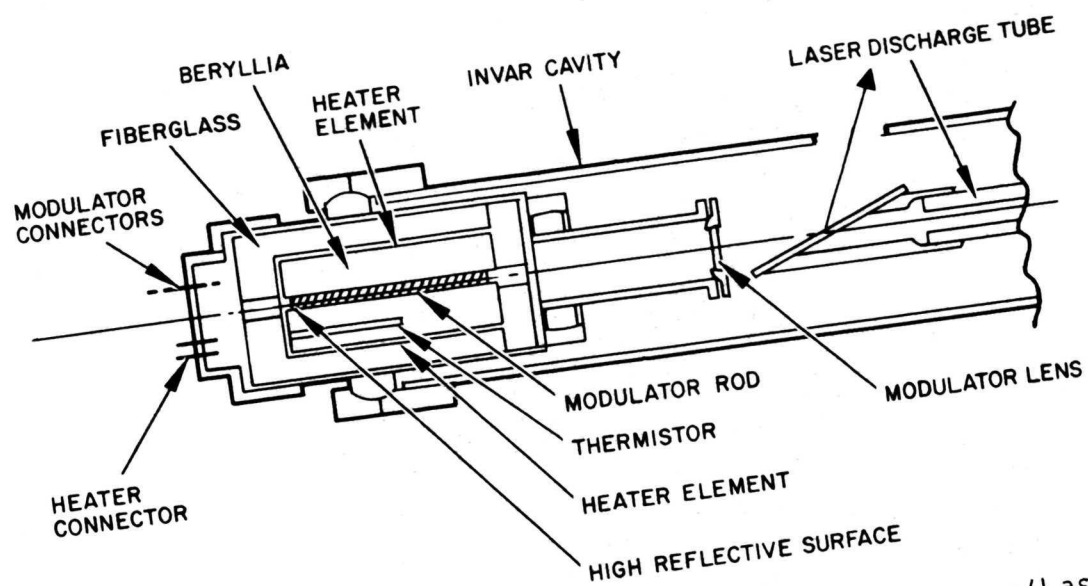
Section Drawing of Assembled Modulator/Laser Interface.
